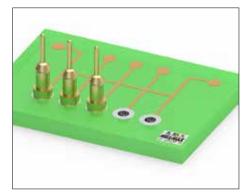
MM 2956-0 soldered into blind via holes on PCB for stability.
